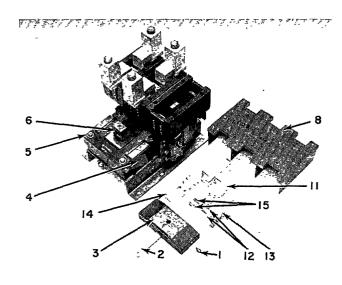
IC5181-C106 a-c contactor, size 6, with coil and contacts removed
